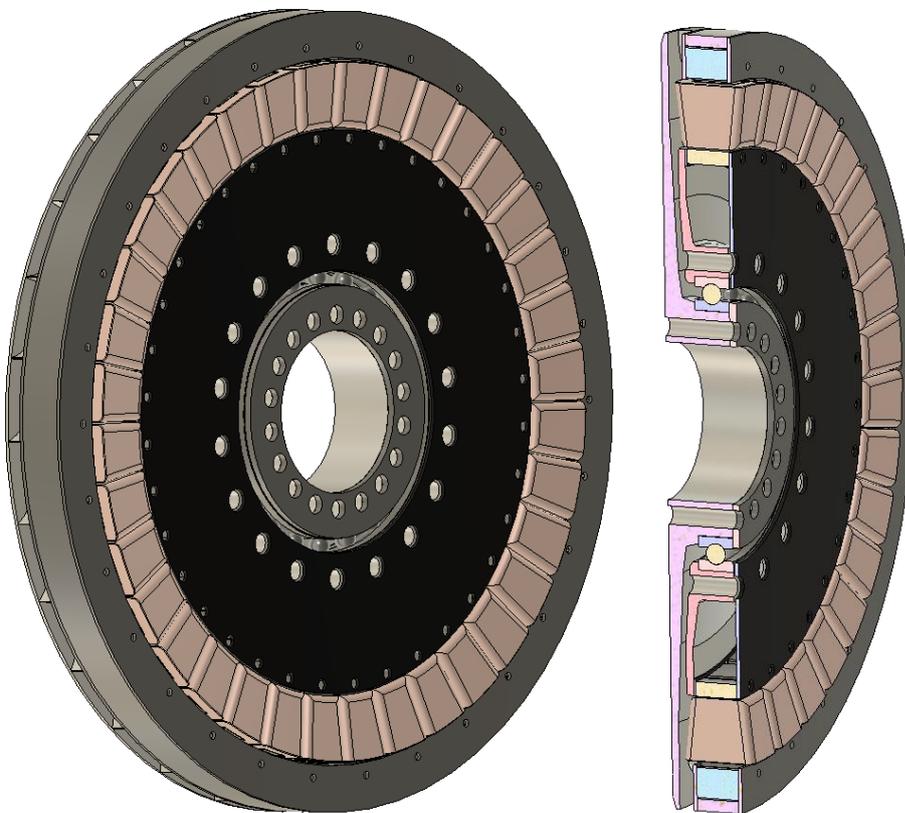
CAD drawing of the electrical motor, overview and cross-section.
